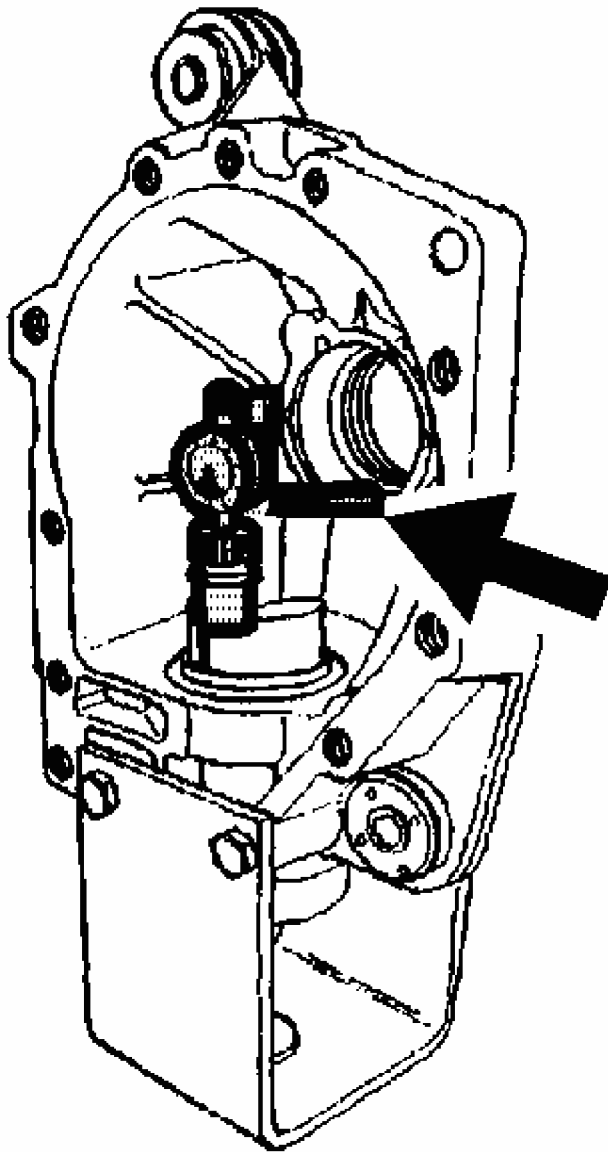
View Of J 33838 installed In Differential Side Bearing Bore
